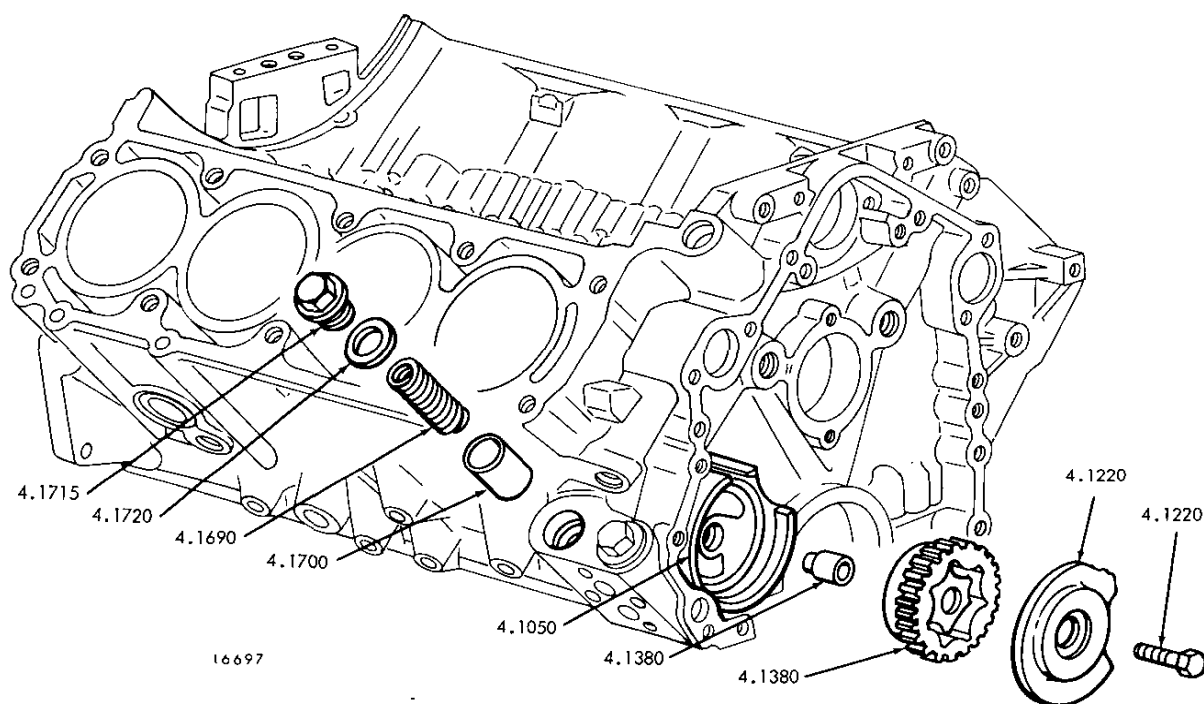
A OIL PUMP &amp; OIL PRESSURE REGULATOR VALVE
